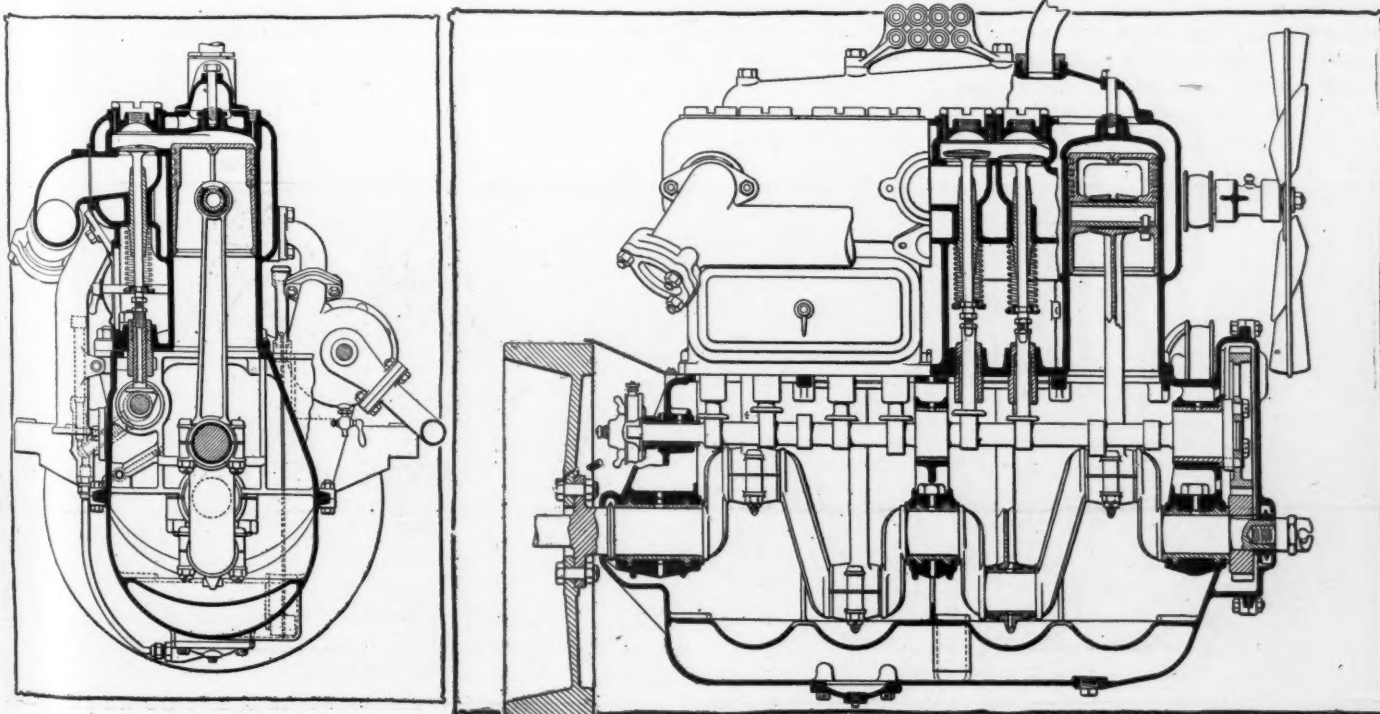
END AND SIDE SECTIONS OF A BUDA L-HEAD BLOCK MOTOR, MODEL O
